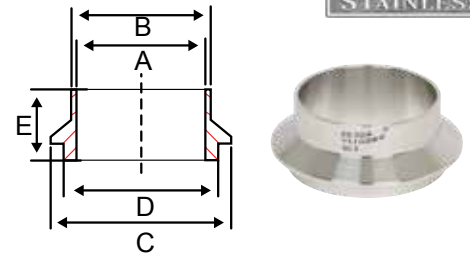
WI4 - Female I-line Short Weld Ferrule
